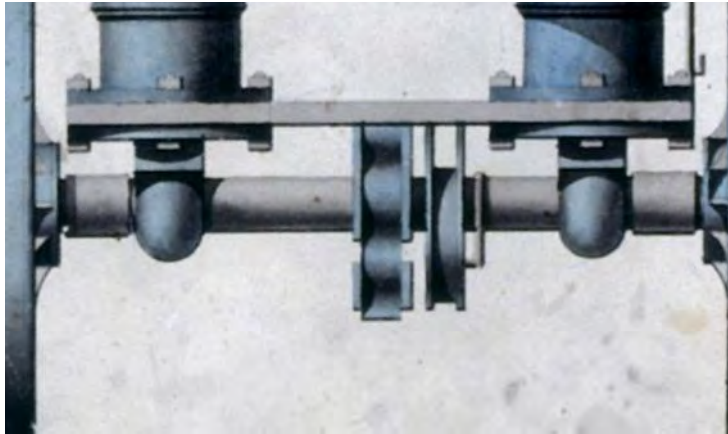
Killingworth-type horns beneath ‘steam springs’.
